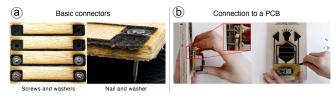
(a) Holes that were drilled by standard laser cutting and connection using screws and washers. Nails and washers can also be used. (b) The connection of a PCB with a microcontroller to a carbon path.
